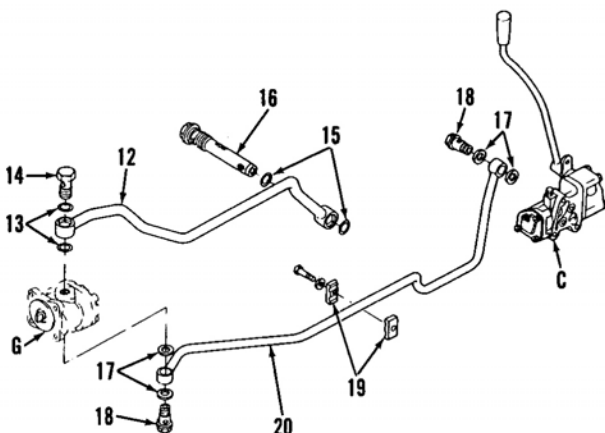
View showing hydraulic lines located between hydraulic gear pump (G) and control valve assembly (C). Some models are equipped with a hydraulic block (Fig. 97) located in pressure line (20).
